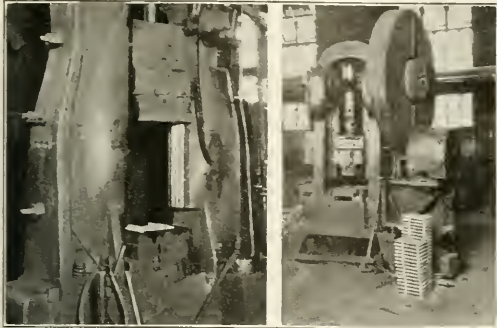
Drop Hammer and Trimming Press Making Column Guides
